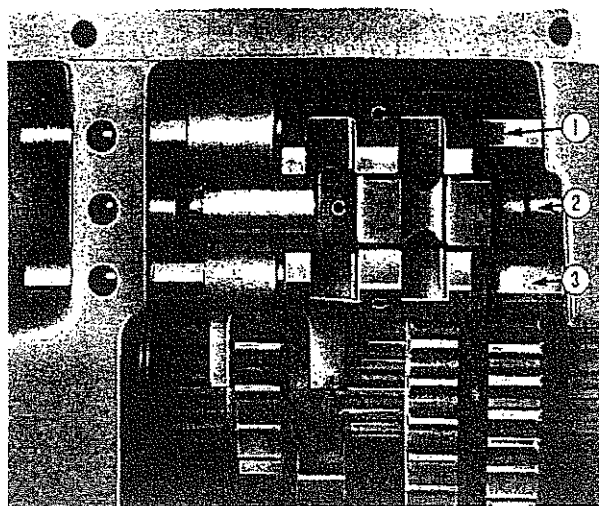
Upper view of gearbox control gears and shifter forks.
